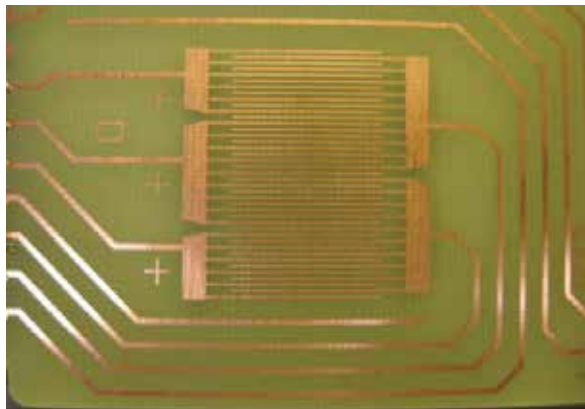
IPC-B-25A test board coated with 3M™ Novec™ 2708 Electronic Grade Coating (test sample 2708-1) after testing per IPC-TM-650 2.6.3.4 (rev. A) test method.
